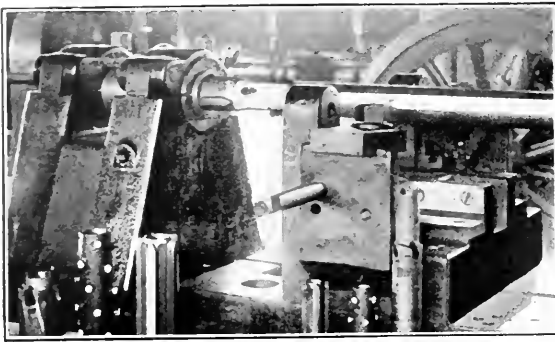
FIXTURE FOR ROUGH-REAMING OPERATION
